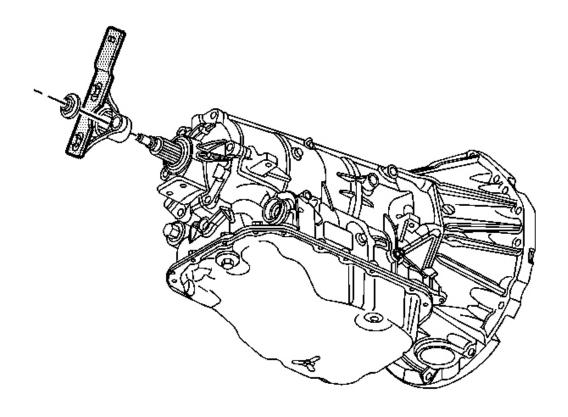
View Of J 45012 Courtesy of GENERAL MOTORS CORP.
